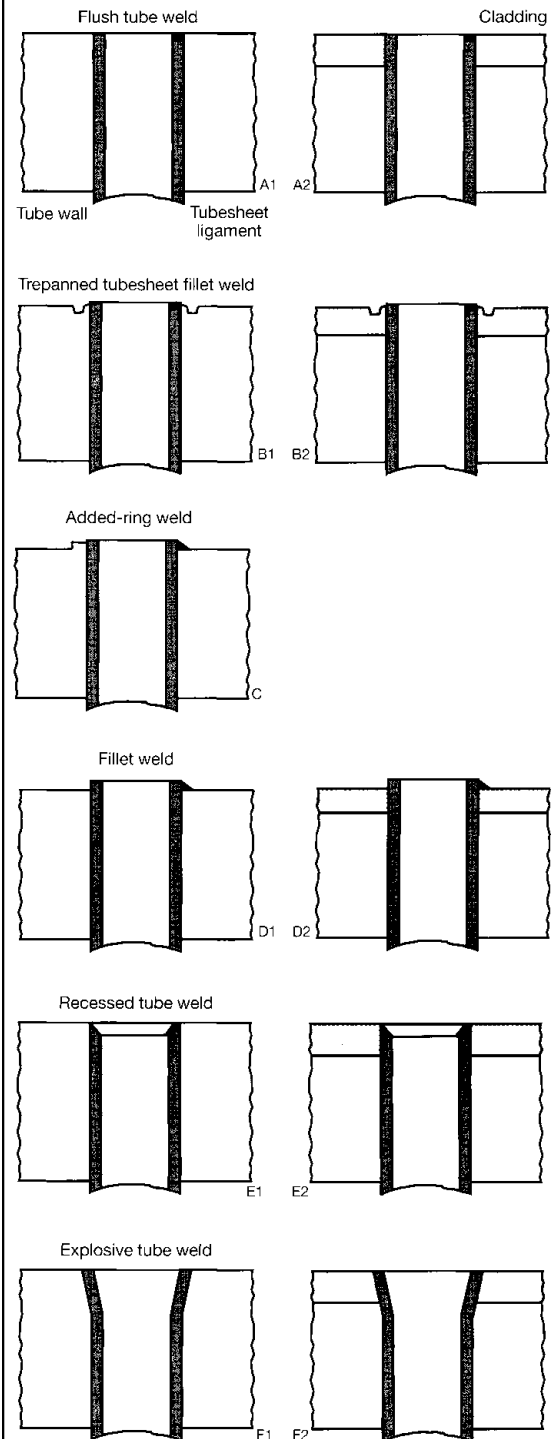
Typical tube weld joint preparation showing finished weld on the right side. The left-hand column is solid copper-nickel tubesheet, the right-hand column clad plate
